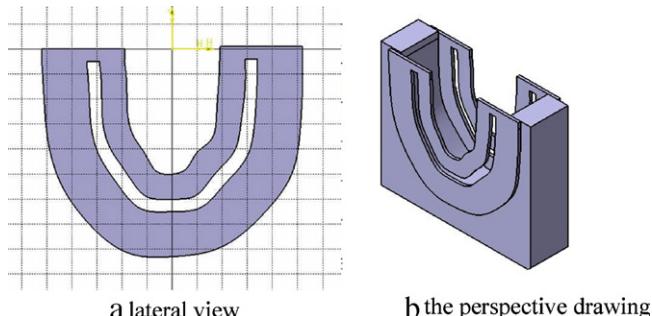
Machined trajectory mechanism (the grid is 1 cm × 1 cm) (a) lateral view and (b) the perspective drawing.
